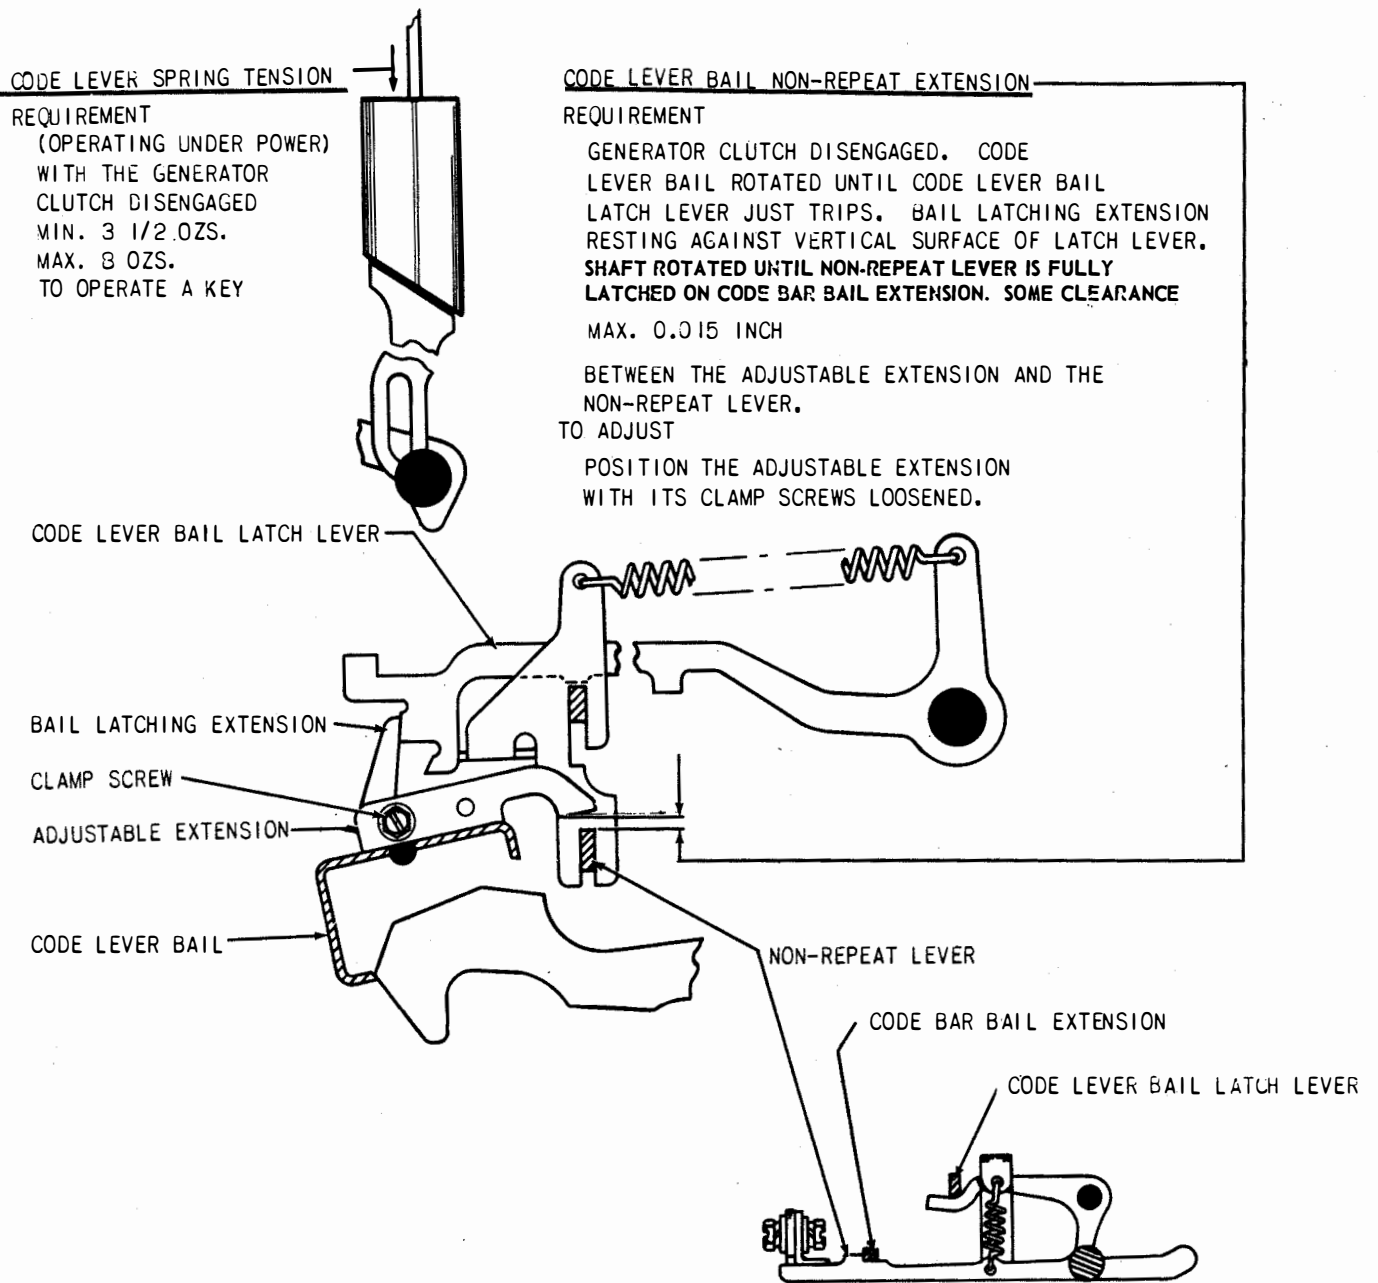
Keyboard, Non-Repeat Mechanism, Left Side View
